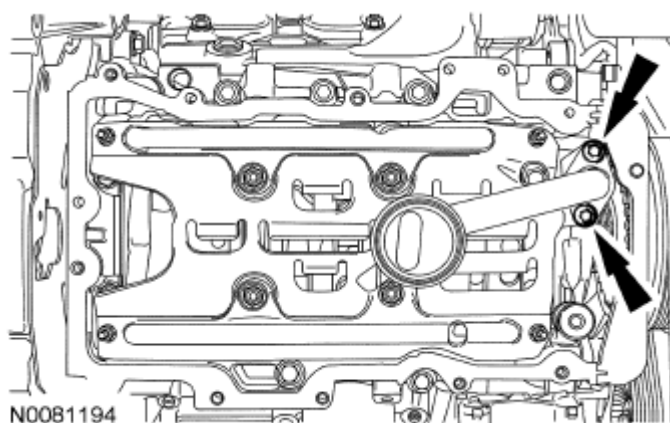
Locating Oil Pump Screen And Pickup Tube
